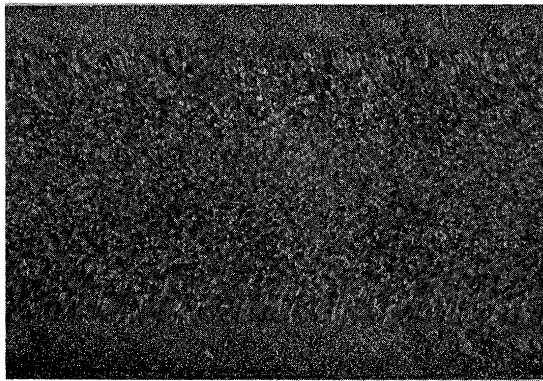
An example of macrostructures of the weld metal of 5083 aluminum alloy.
